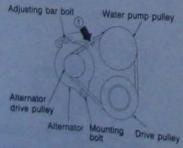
,14 Alternator drivebelt adjustment (1) B series engines (Sec 11) ment tension checking
